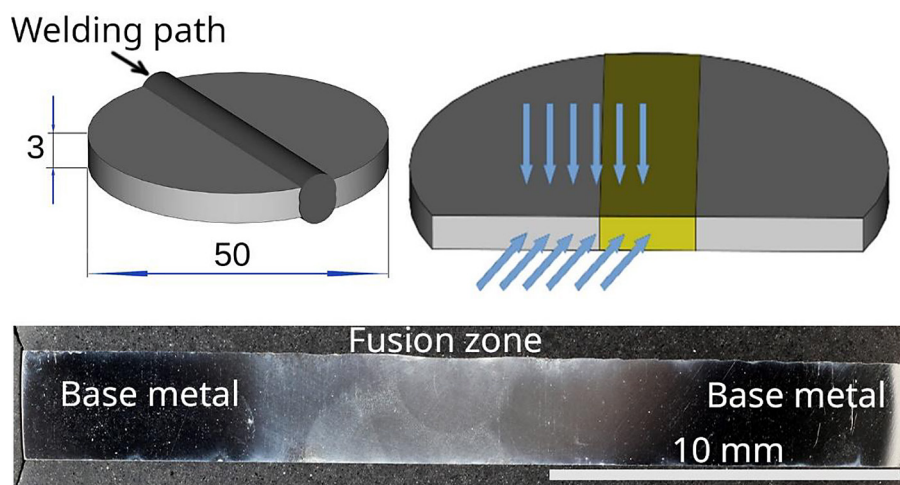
Schematic diagram of the weld and analysed surfaces. Bottom figure is the cross-section of the Inconel 718 weld part
